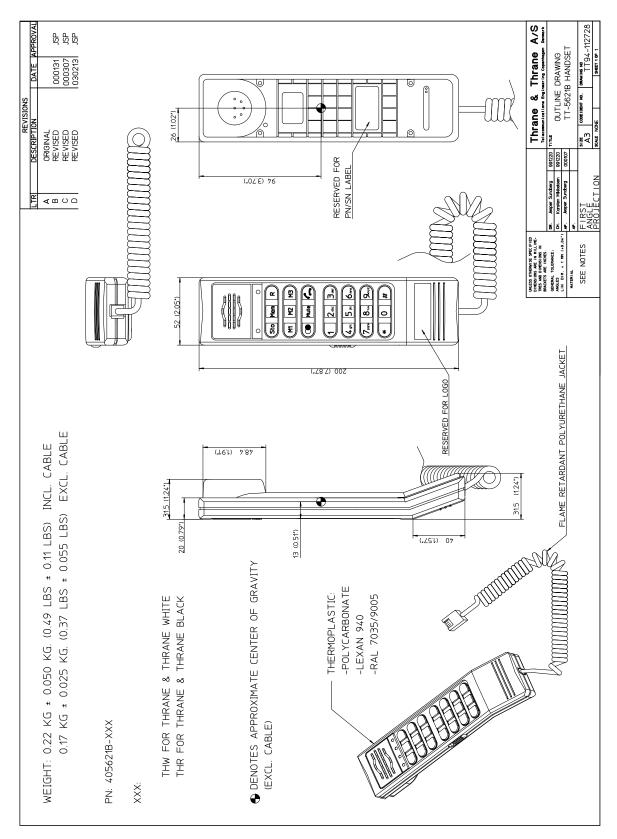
Outline drawing: TT-5621B 2-Wire Handset
